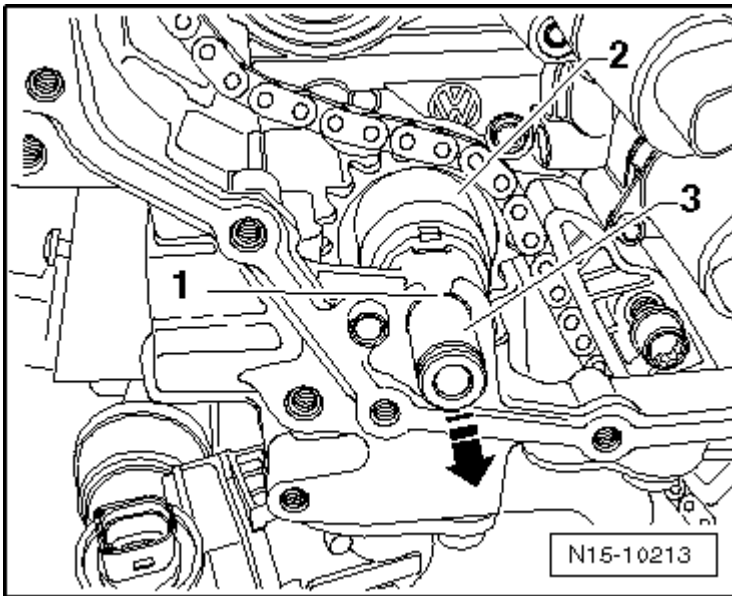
Identifying Cylinder Head, Bearing Shaft & High Pressure Pump
